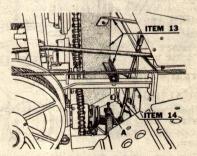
Hoist Worm Shaft Clutch Control—Right Side
